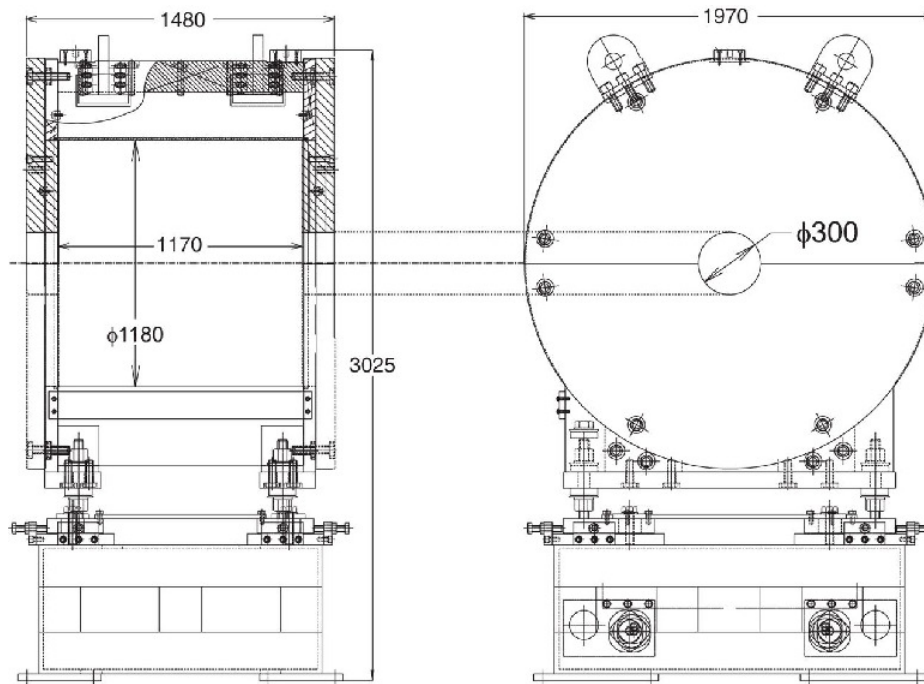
Design of the solenoid magnet (all dimensions in mm). Taken from Ref.[60].
